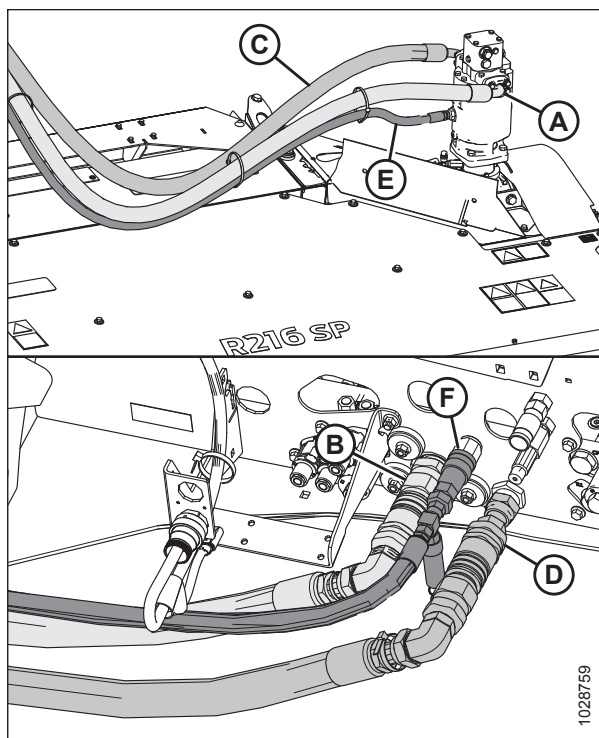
Hydraulic Connections on Rotary Disc Header and M1240 Windrower
